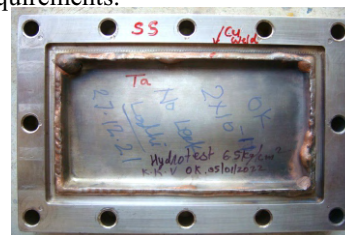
Tantalum brazed to 316L SS using GTA braze, employing OFE copper filler in a controlled argon atmosphere. The brazing involved a 1 mm thick tantalum sheet centrally positioned and joined along its rectangular perimeter.
